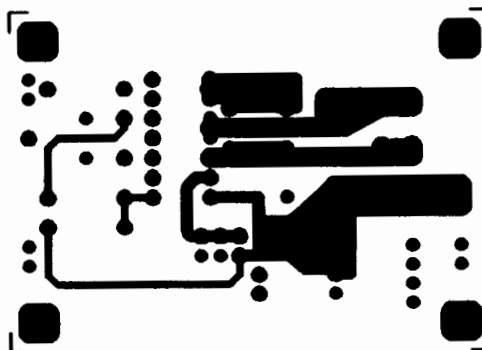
DIP PC Layout, Solder Side (Viewed from Component Side, 1x Scale)
